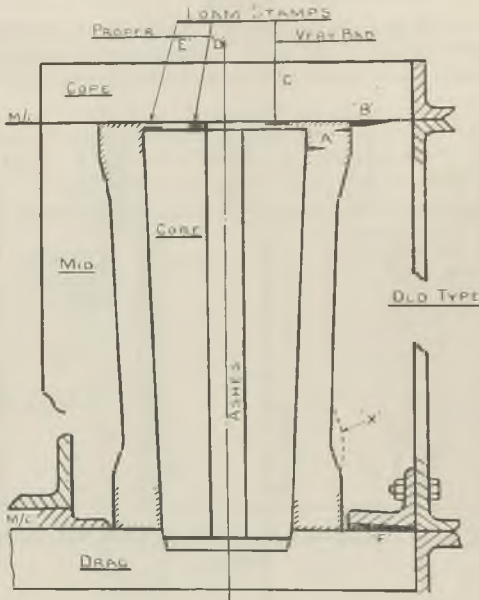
PENCIL GATES ON INVERTED MOULD.
